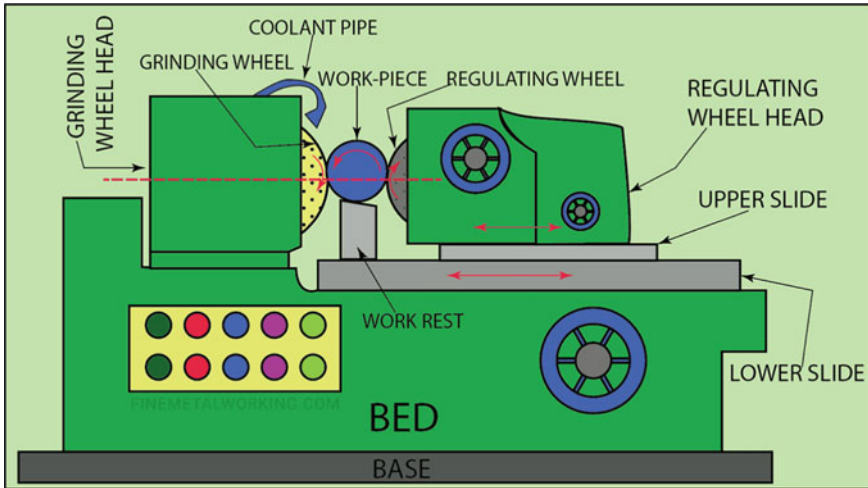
A typical centerless grinding machine (adapted from [43])
